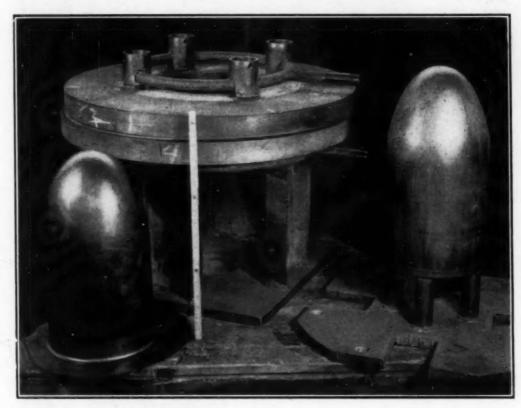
As-Drawn Power Unit Cover Made from 0.072 Ma Alloy Sheet and Draw Die Used to Form It.
